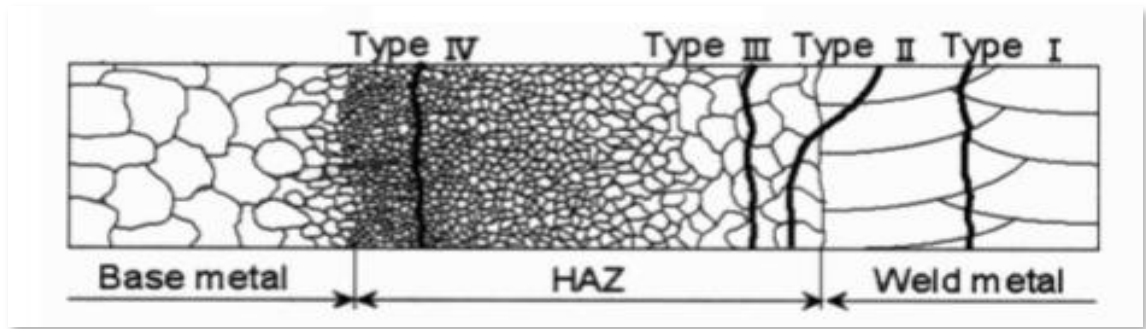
Schematic showing the types of cracking of welded joints.
